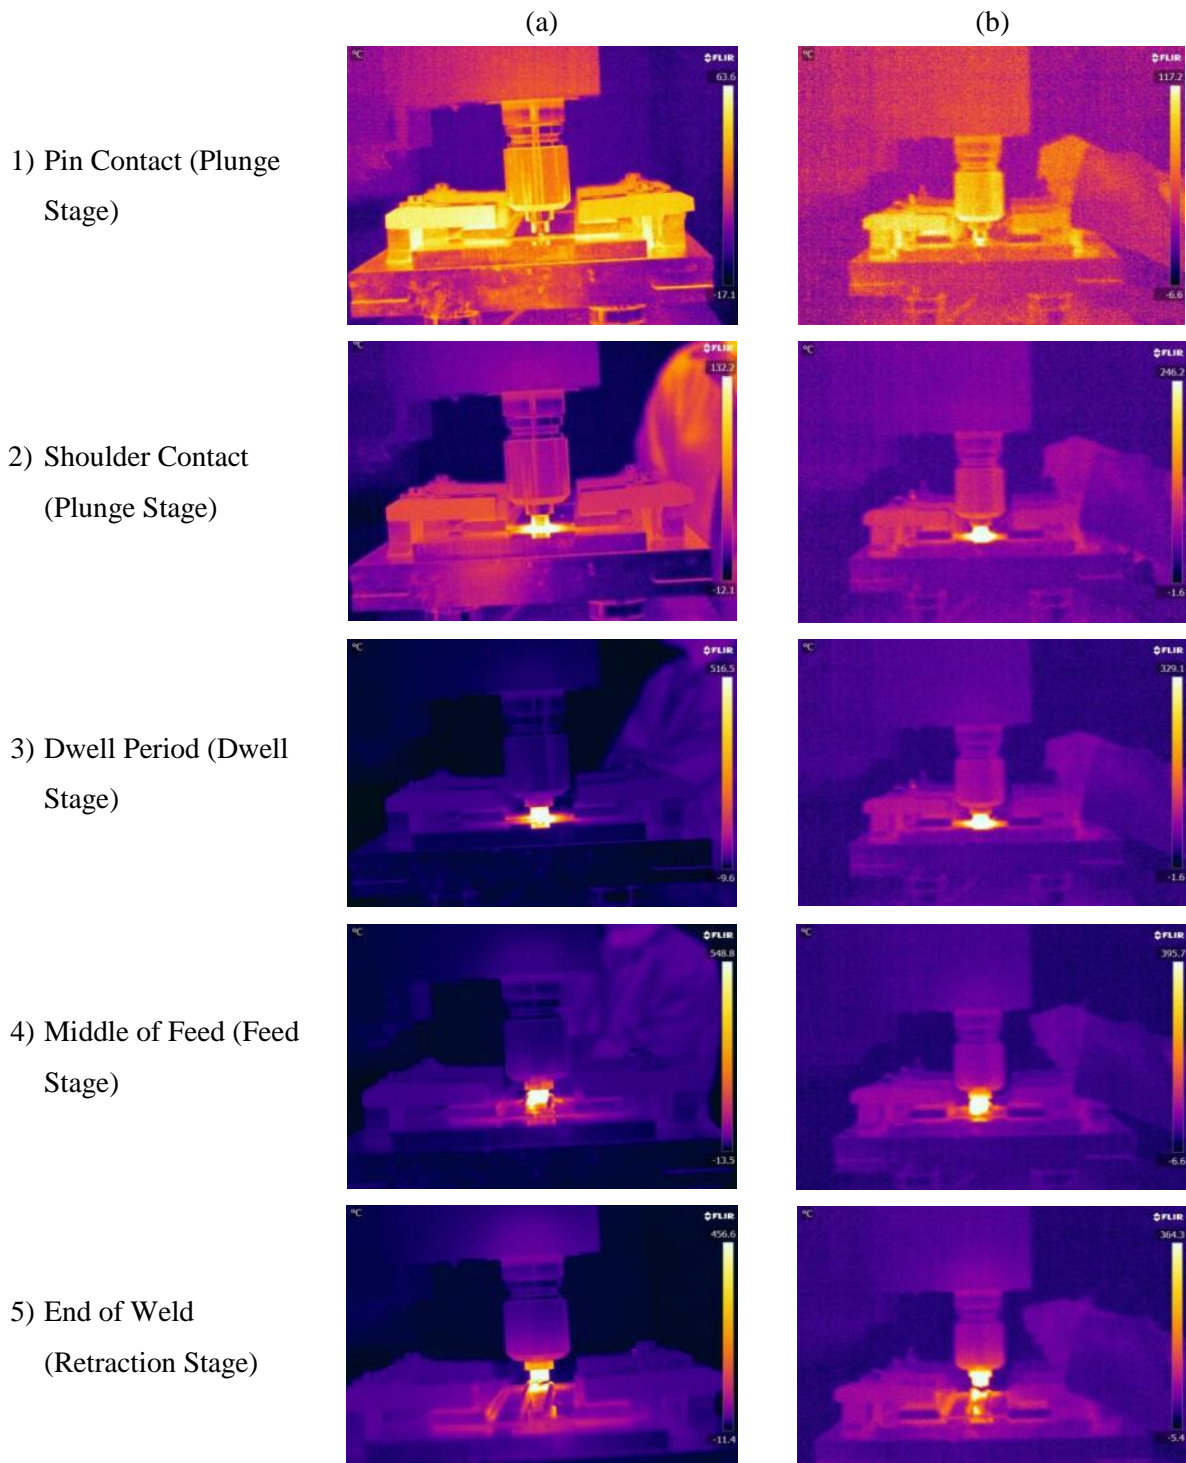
Thermal Imaging of the Welding Process at Two Measurement Ranges
